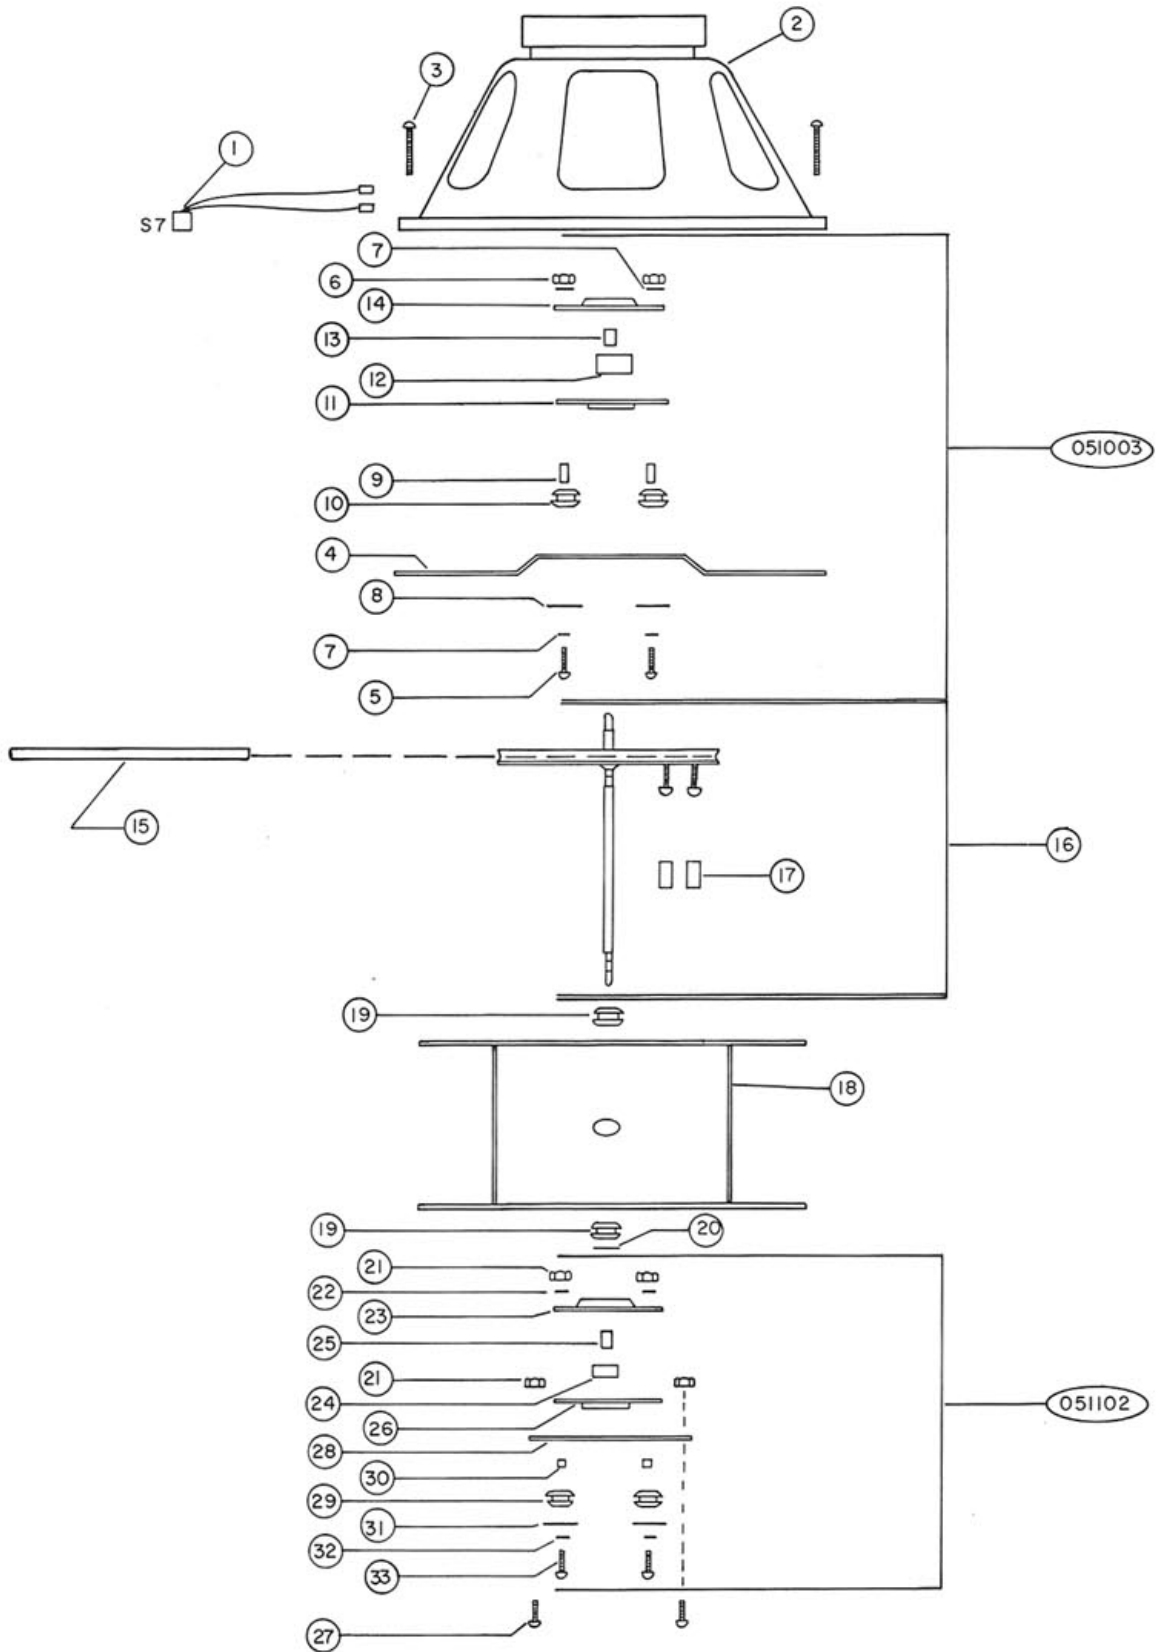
Bass Speaker, Lower Rotor, and Associated Parts
